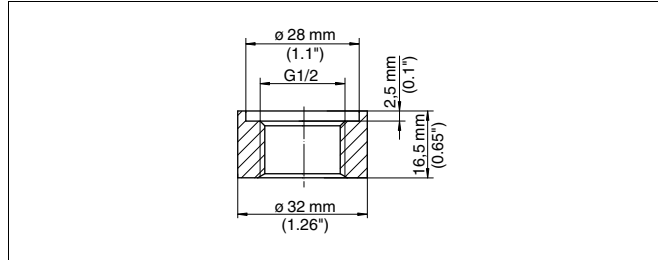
Dimensions welded socket G $\frac{1}{2}$  A acc. to DIN 3852-X
